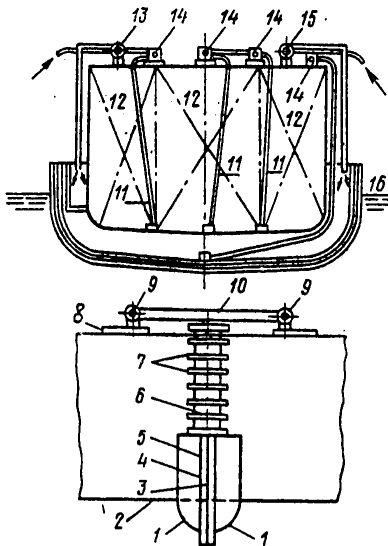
Caisson structure for welding two parts of a ship afloat. 1--parts of the caisson installed on the hull and bow sections of the ship; 2--bottom of the ship; 3--rubber gaskets; 4--connecting flange of the caisson; 5--clamping bolts; 6--clamps with bolts; 7--temporary wedge clamps; 8--upper deck; 9--electric winches; 10--cables for drawing up the parts of the ship; 11--drainage lines; 12--ballast tanks; 13--delivery fan; 14--pump; 15--exhaust fan; 16--water level.
